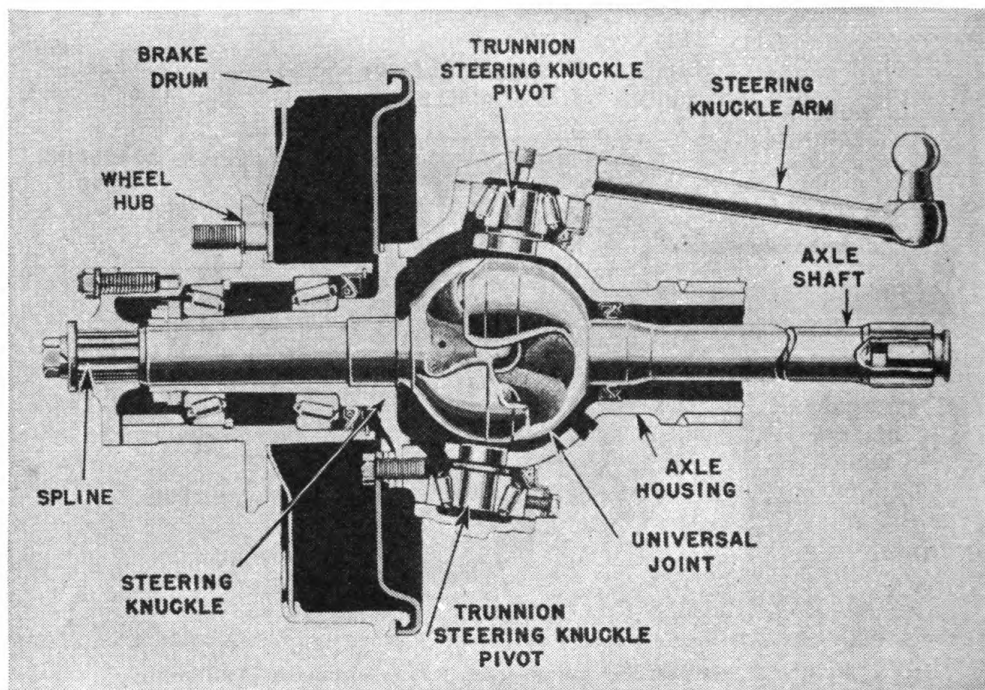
Construction of an axle end for a wheel that drives and steers.
